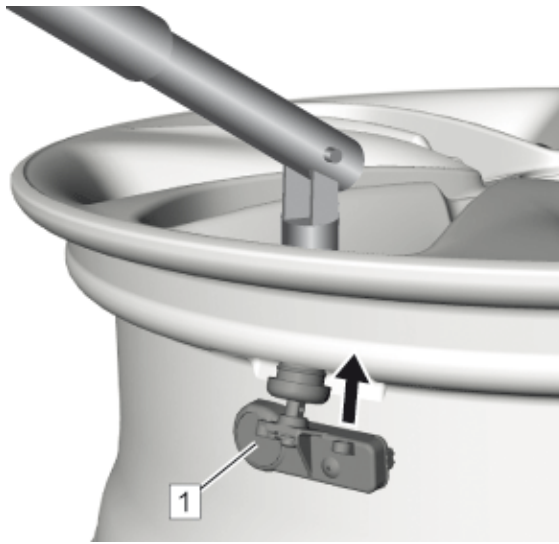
Pull Valve Stem Through Rim Using Special Tool
